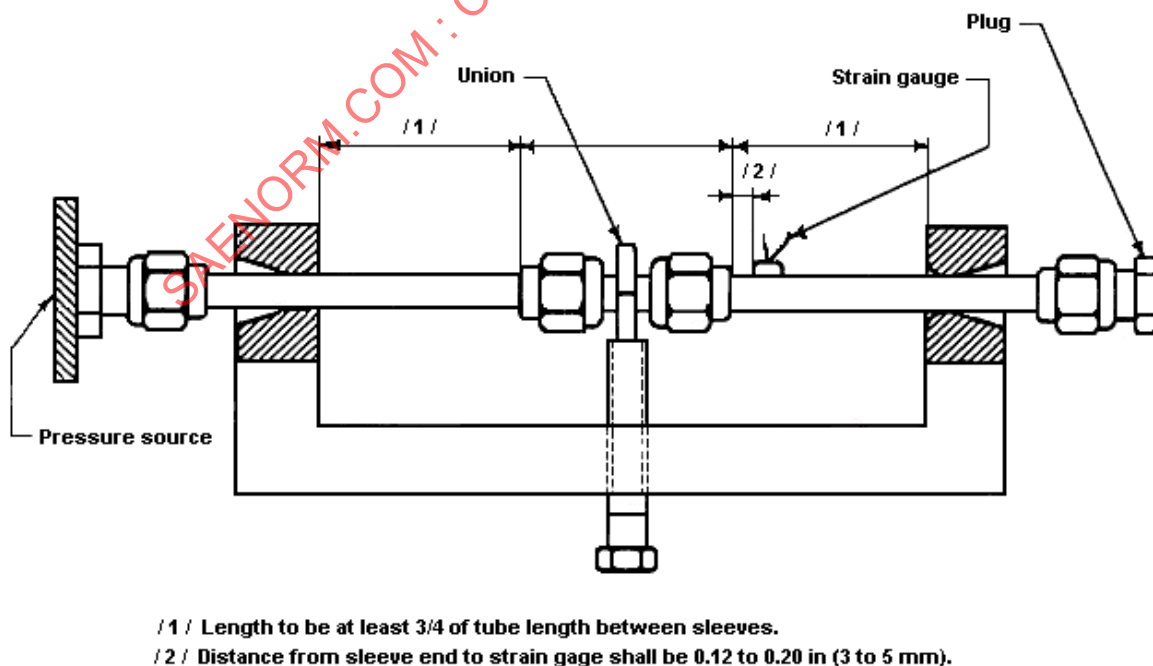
SCHEMATIC DIAGRAM OF STRESS CORROSION TEST ASSEMBLY
